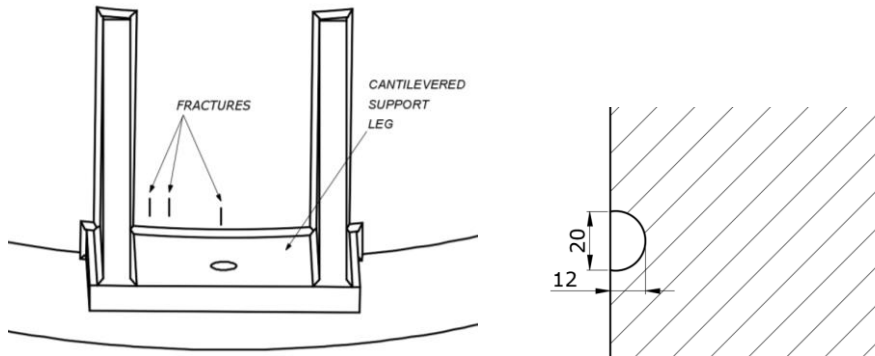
Locations of fractures on the vessel (a), Dimensions of fractures (b)
